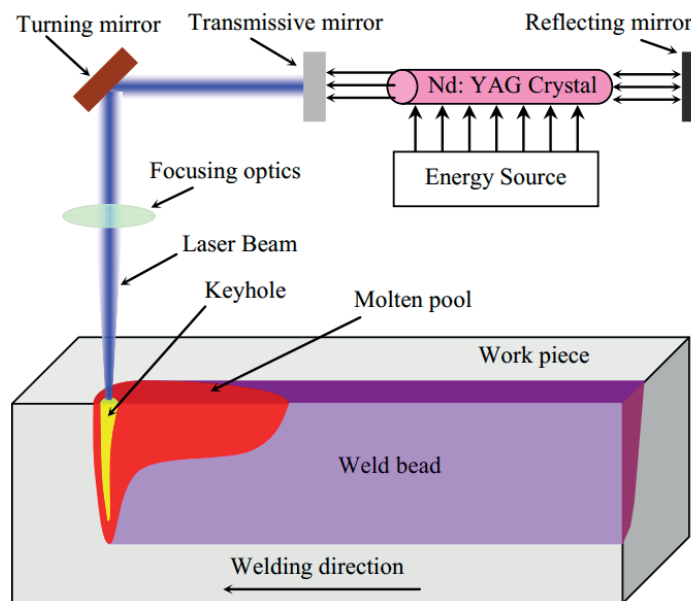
2 Principle of laser Nd:YAG welding [20]
